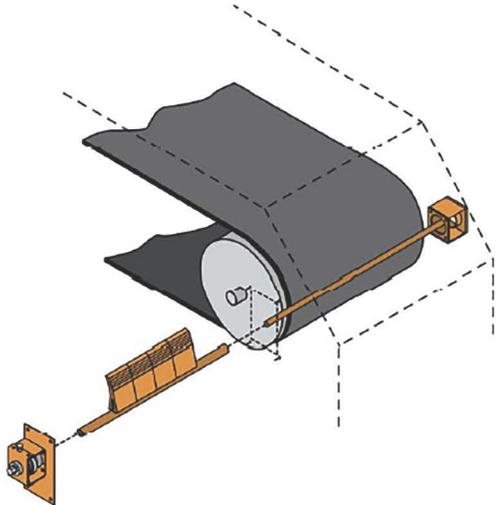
A slide-out mandrel assembly makes the removal and replacement operation faster and safer.
